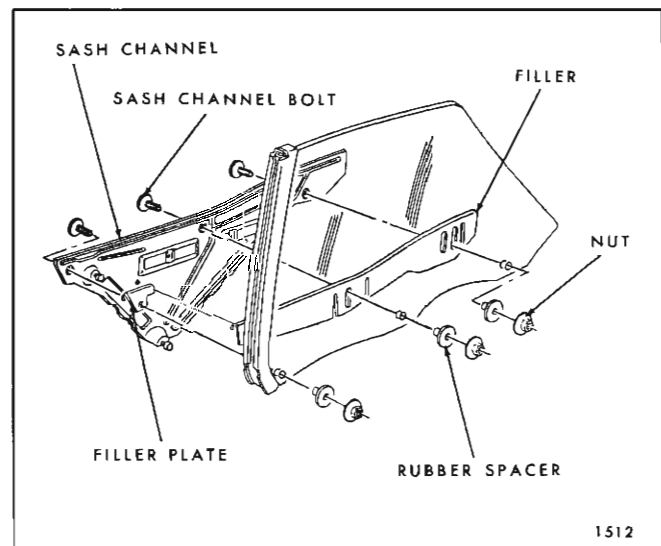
E22—Rear Quarter Window Assembly - "67" Style
